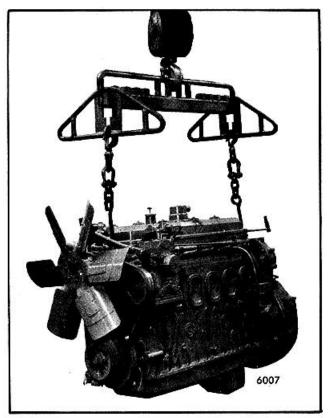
Lifting Engine with Spreader and Sling 22. Lift out engine-transmission assembly from vehicle.
